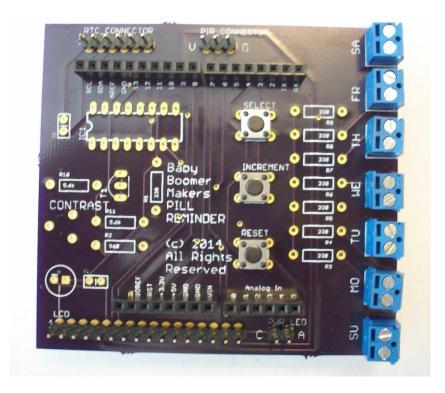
Shield Board with Screw terminals and Pushbuttons Attached.
